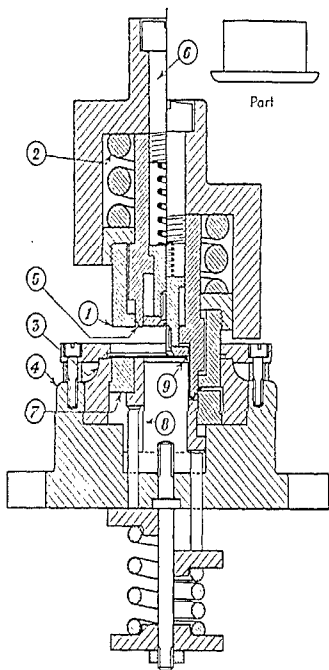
Combination die to blank, draw, form, trim, and pierce a ferrule. Drawing shows relative positions of die components at both ends of stroke.¹⁵
